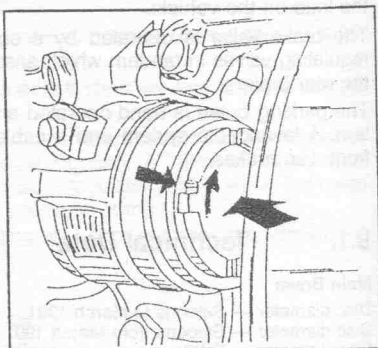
The arrows show the movement of the piston to push it back into the bore.
